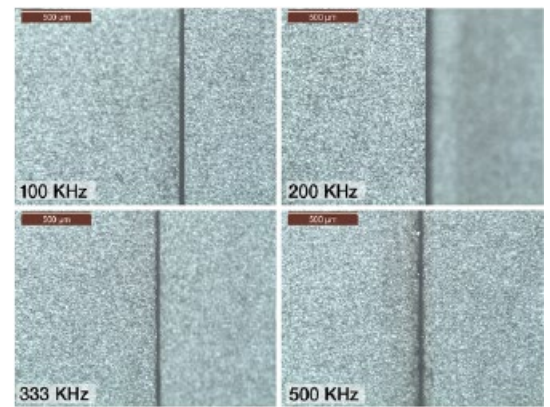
0.2 mm thick Nitinol cut with different PRFs, with set laser power of 8 W and 2 mm/s cutting speed
